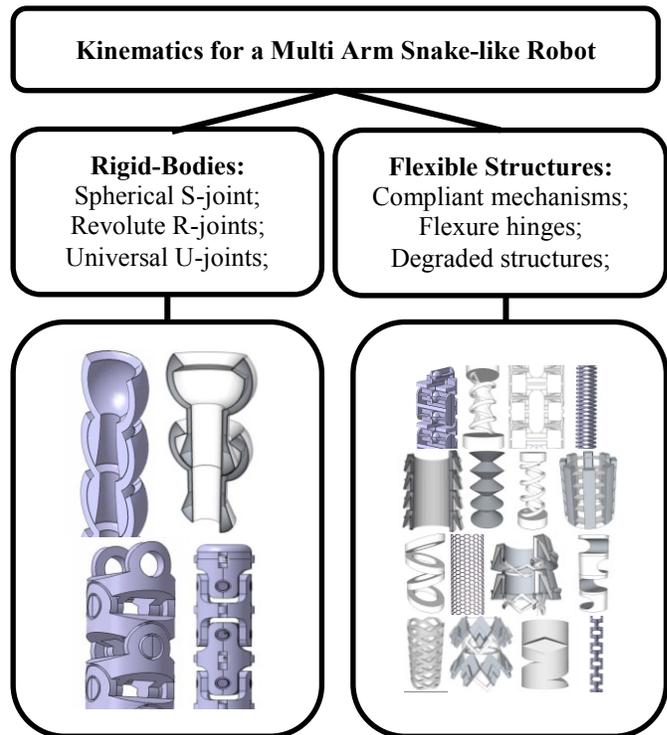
Overview of design principles and realized designs (lower pictures) to build a Multi Arm Snake-Like Robot: left: real joints (manufactured in one part: monolithic), not assembled or glued and right: different shapes of kinematics based on flexure hinges. Structures on the right are flexible joints based on the flexibility of the used material.
